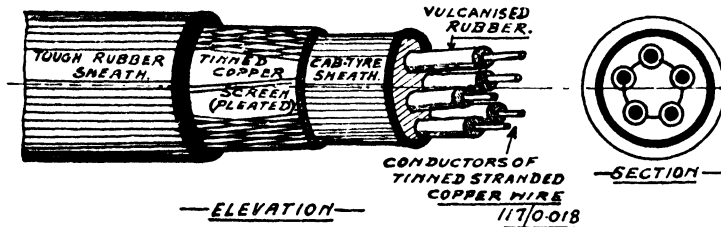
Trailing Cable for Coal-cutter for Remote Control.
